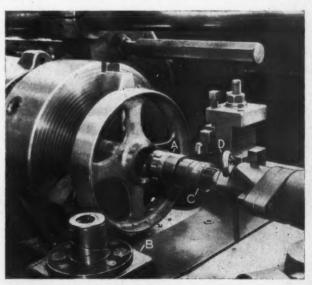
Set-up on a Ward No. 7 turret lathe for finishing the bore of a drive pulley for an Empire wire-stitching machine, using a Rodo roller-finishing tool
